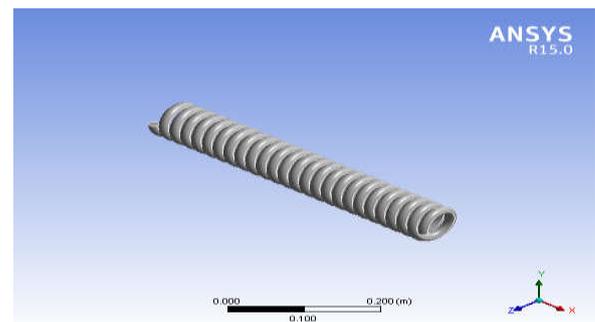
3D model of tapered helical coil heat exchanger with PCD 50 mm, tapered angle 2° and tube diameter 10 mm
